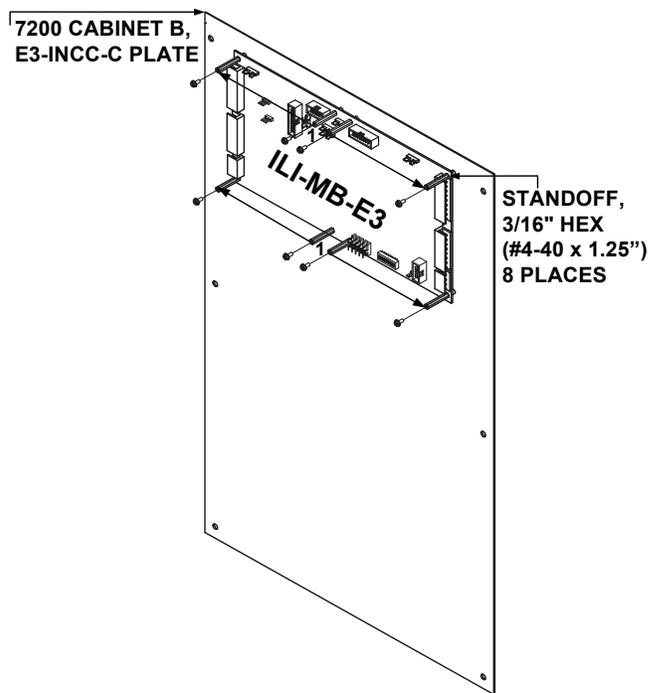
ILI-MB-E3 Installed to the 7200 Retrofit Cabinet Mounting Plate
